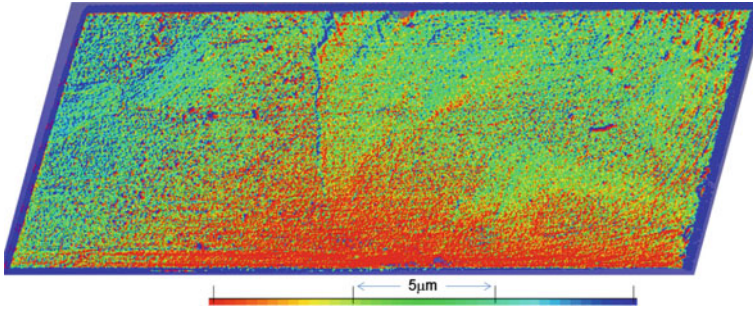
Pitch and tooth flank form accuracy of an IPB wheel
